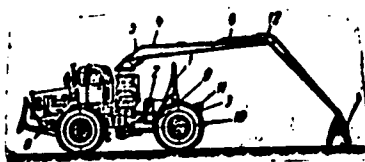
1 - pick-up assembly; 2 - hoist;
